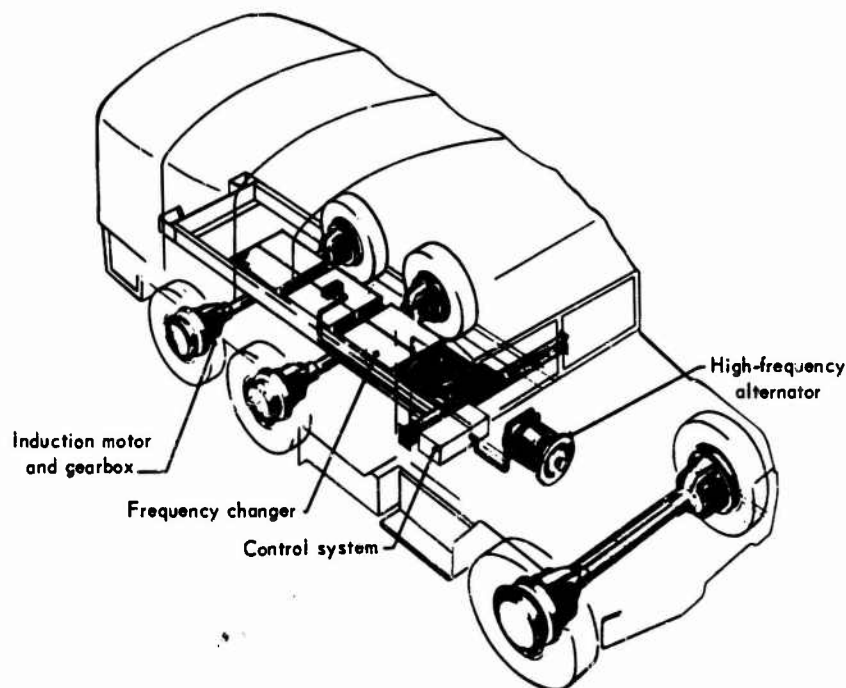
Ac Electric-Wheel-Drive Component Installation
